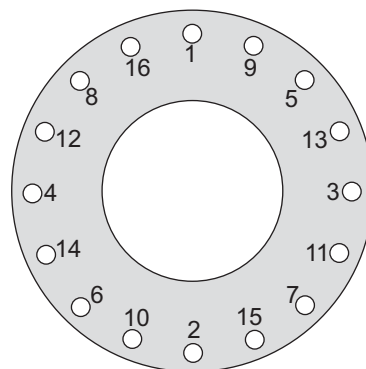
Tighten bolts diagonally / 16 bolts, spacing 22.5°
